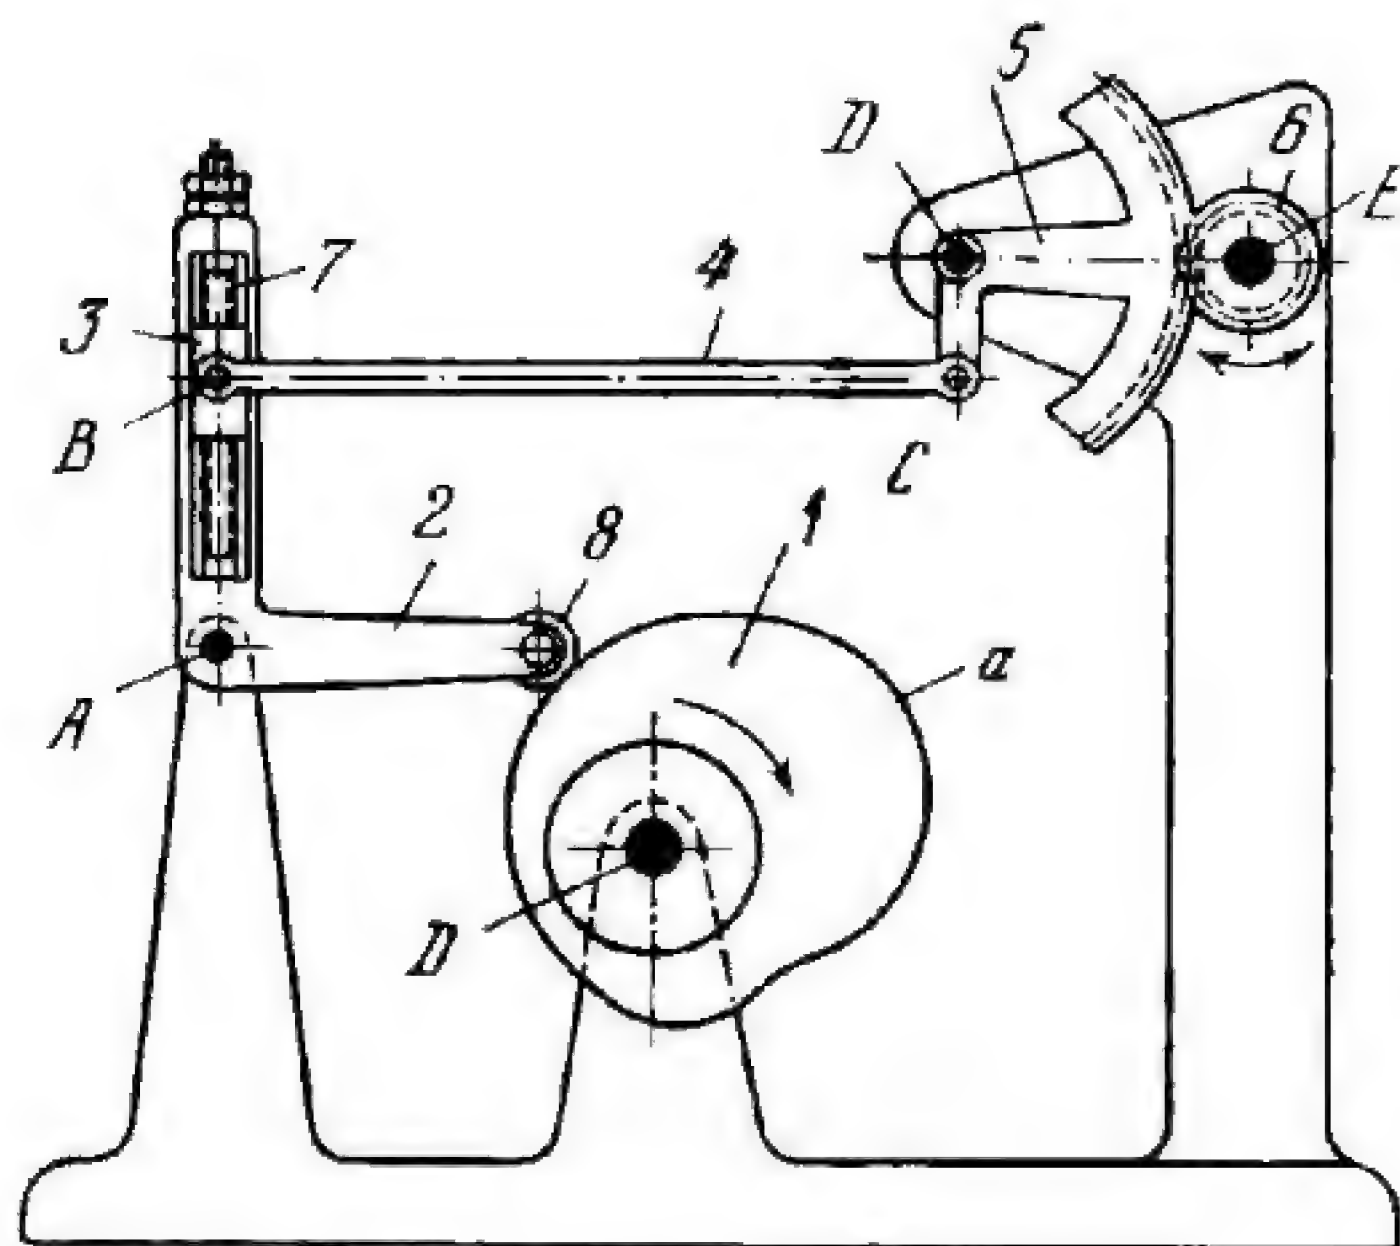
rotates about fixed axis *D*. Follower 2 turns about fixed axis *A* and carries roller 8 which rolls along contour *a* of cam 1. Follower 2 has screw 7 with a nut by means of which slider 3 can be adjusted to various positions along screw 7. This varies distance  $\overline{AB}$  on follower 2. Connecting rod 4 is connected by turning pairs *B* and *C* to follower 2 and to segment gear 5 which turns about fixed axis *D* and meshes with gear 6. Gear 6 oscillates about fixed axis *E* and its angle of oscillation can be adjusted by means of screw 7.
